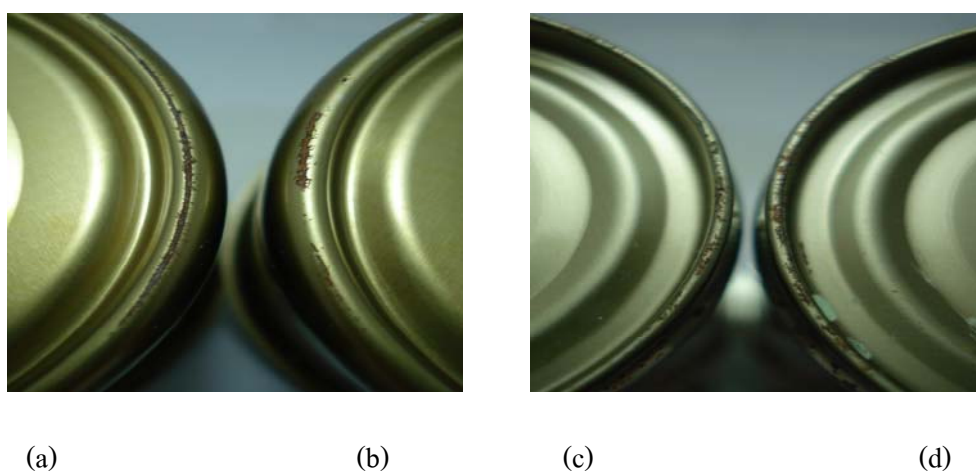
Rust caused by bottom scratch in two pieces can from top chain (a) and rubber conveyer (b) and in three pieces can from multiflex (c) and rubber conveyer (d)
